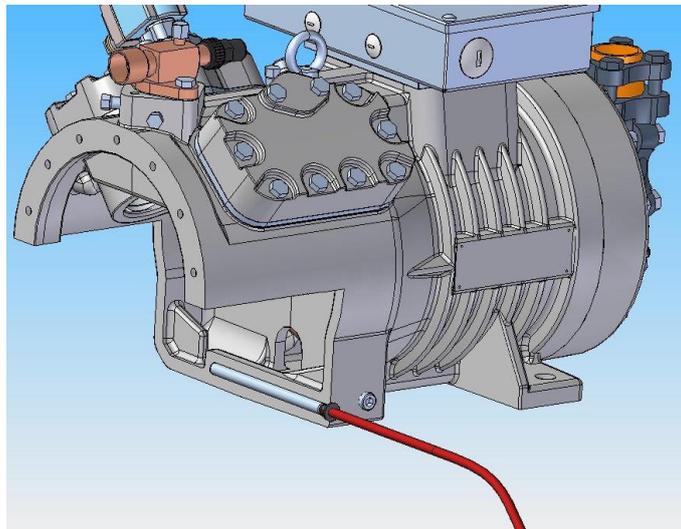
Crankcase heater (PTC type) for compressors PP4-L/HFxx and PP4-L/HNxx
